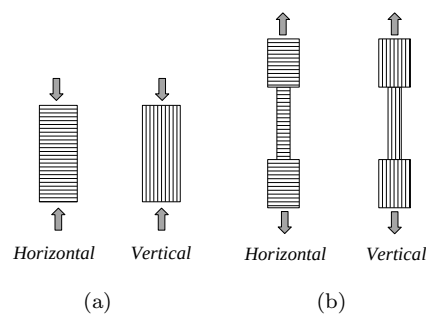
PA12 test samples: (a) Compression test specimens; and (b) Tensile test specimens.
